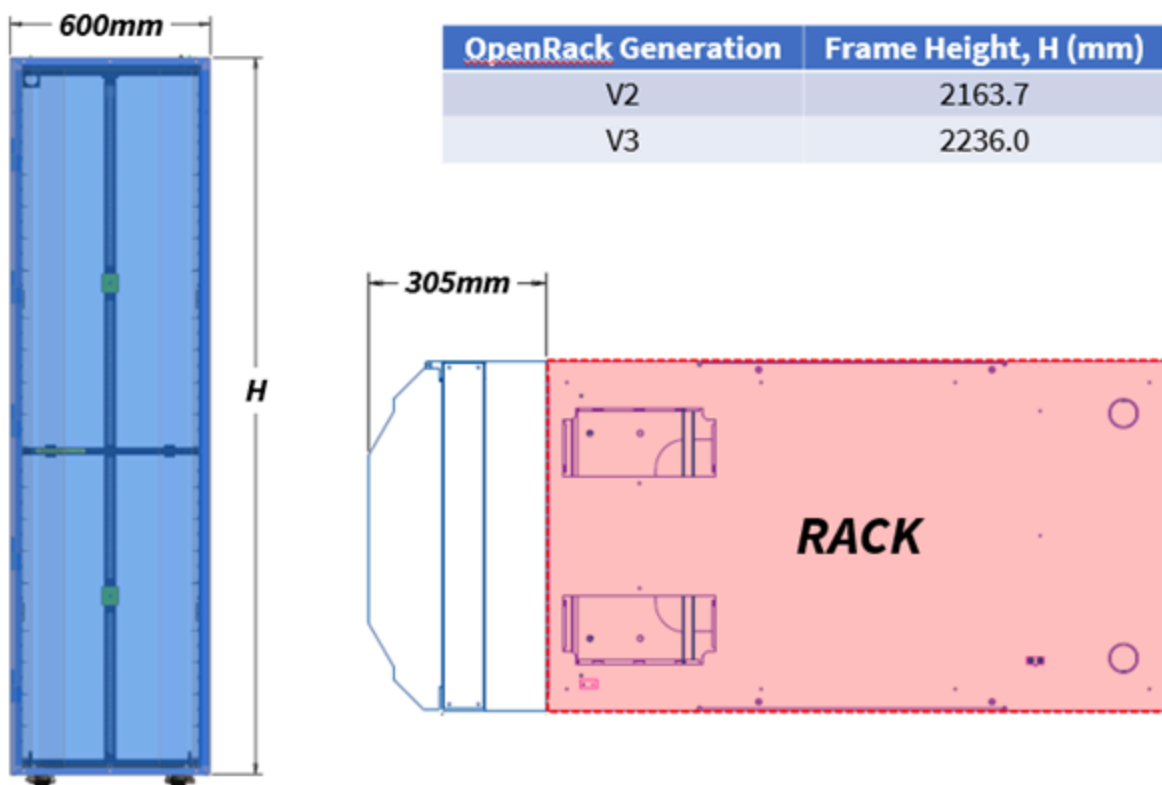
Rear and top view of Open Rack showing maximum dimensions of mounted Door HX assembly
